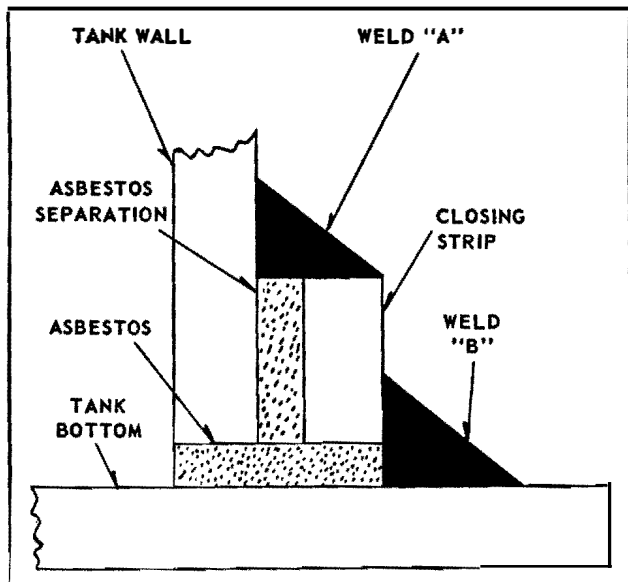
Weld between Tank Wall and Tank Bottom
